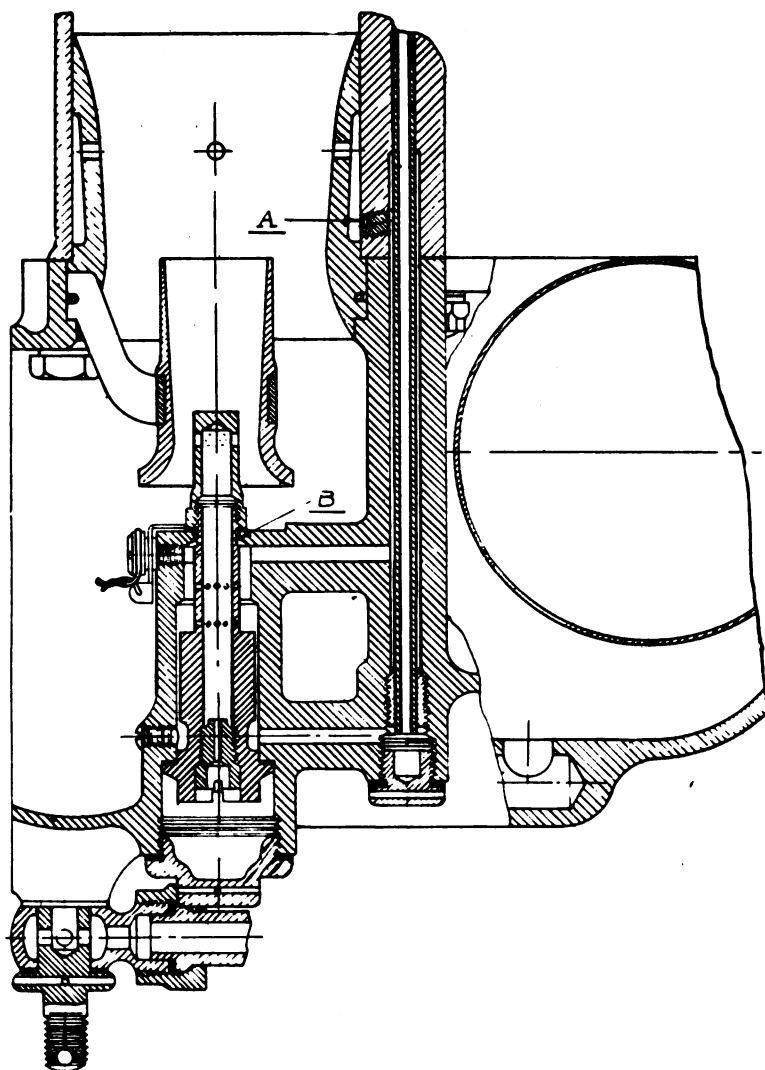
Sectional view of modified NA-D6 carburetor showing new wells, jets, discharge nozzles, and air-metering plugs in place.
